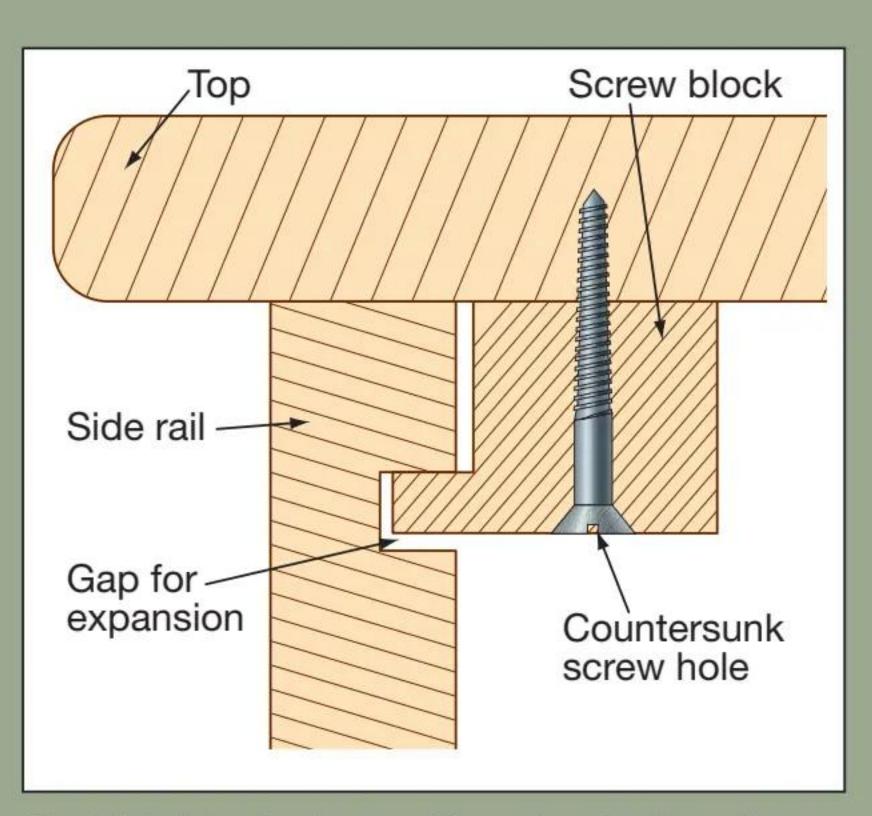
Cabriole stool assembly – showing how the screw blocks are used
